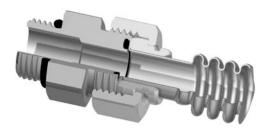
Seal-Lok Lite Flex Flange assembly.
